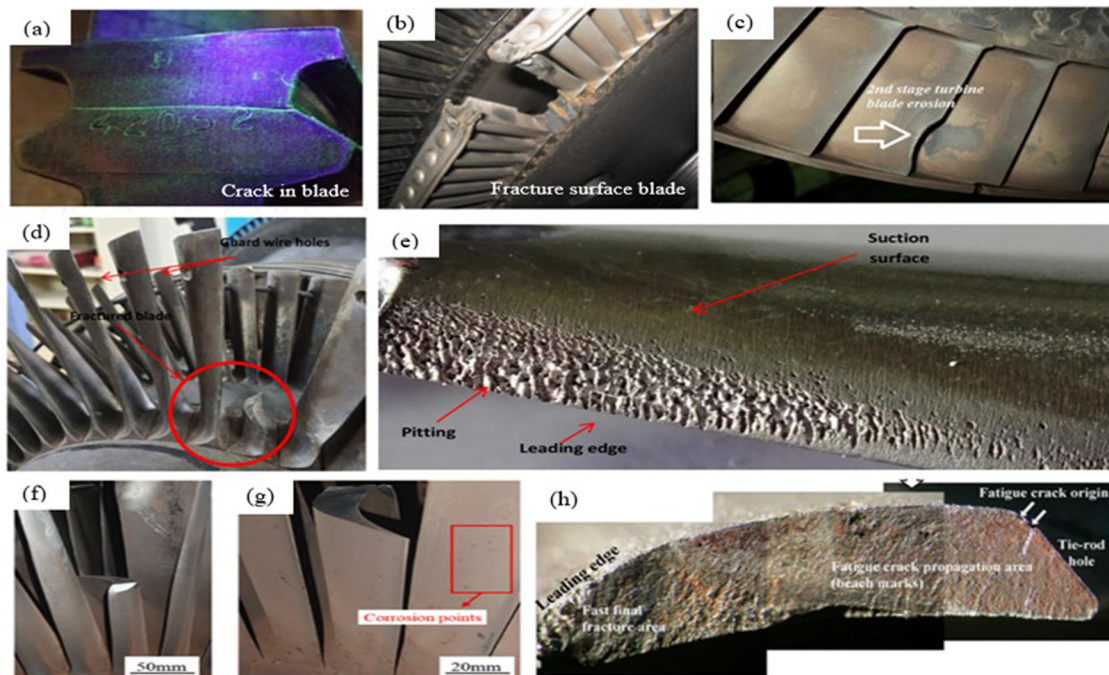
Common failure modes in steam turbine blades are depicted: (a) crack localization on last stage LP turbine blades, (b) fracture surface of rotor blade, (c) erosion on HP turbine rotor blade, (d) fractured blade failure in LP last stage, (e) pitting along the leading edge of turbine blade, (f and g) corrosion and fracture on blade surface, and (h) fracture surface of cracked steam turbine blade. Reproduced from [14–19].
